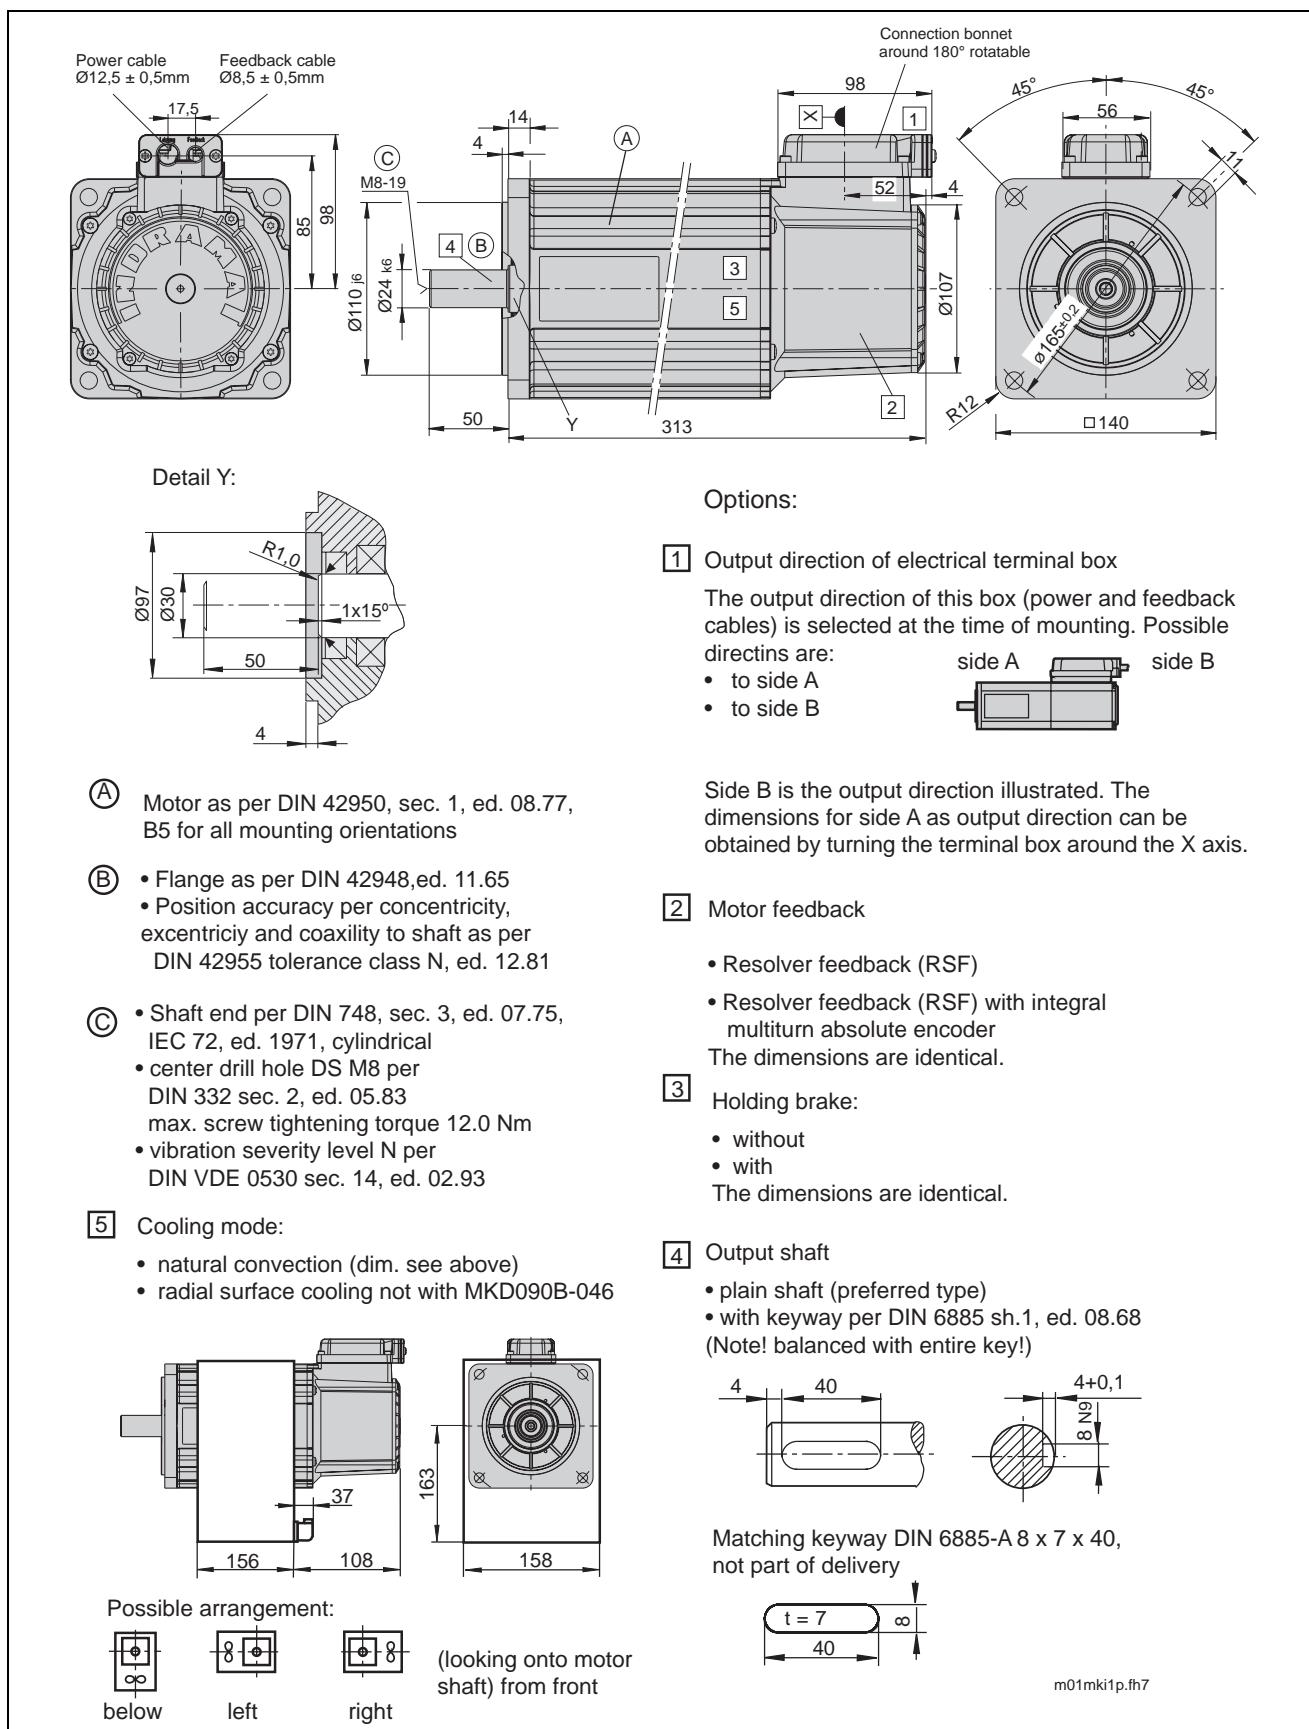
Dimensions sheet MKD090B-035, -046, -047, -058
